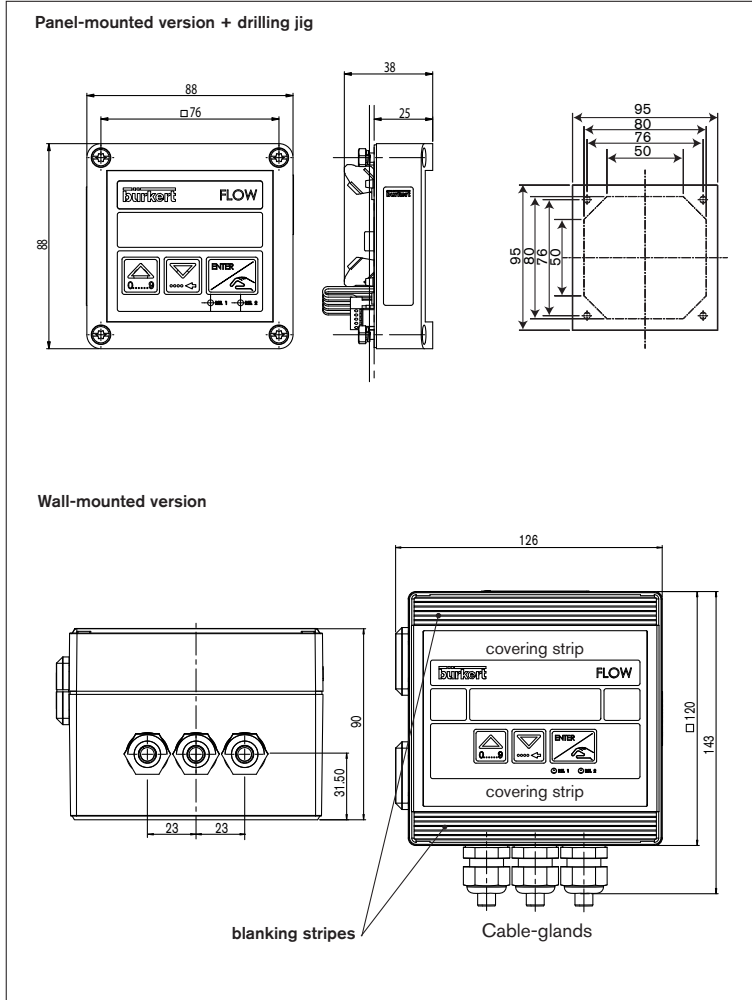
Dimensions of flow transmitter 8025 Universal
